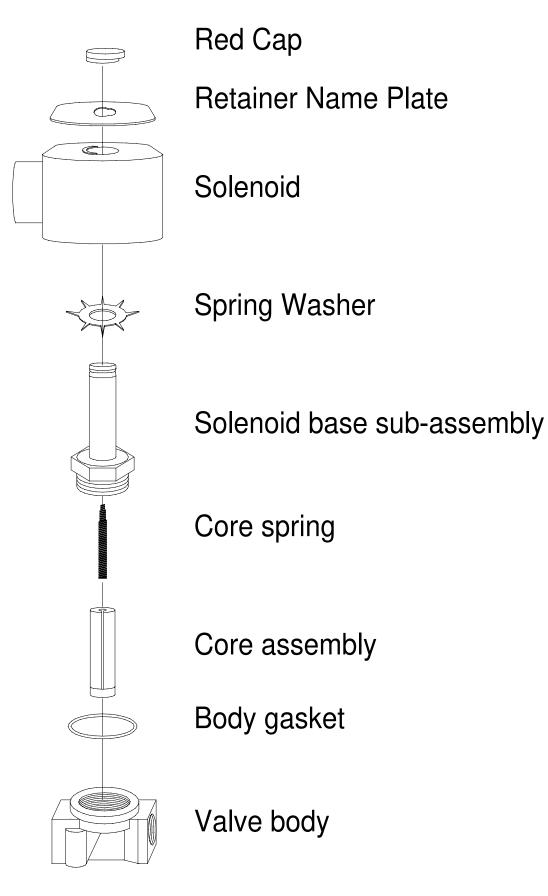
Anti-siphon Valve Exploded View (PF-10 Only)
